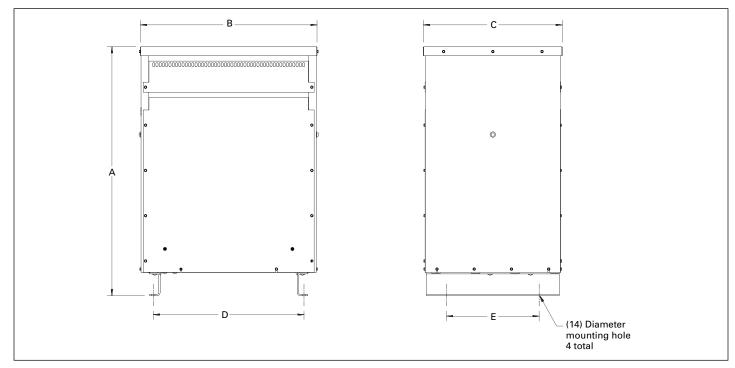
Three-phase enclosures FR940 to FR945 – dimensions in inches (mm)
